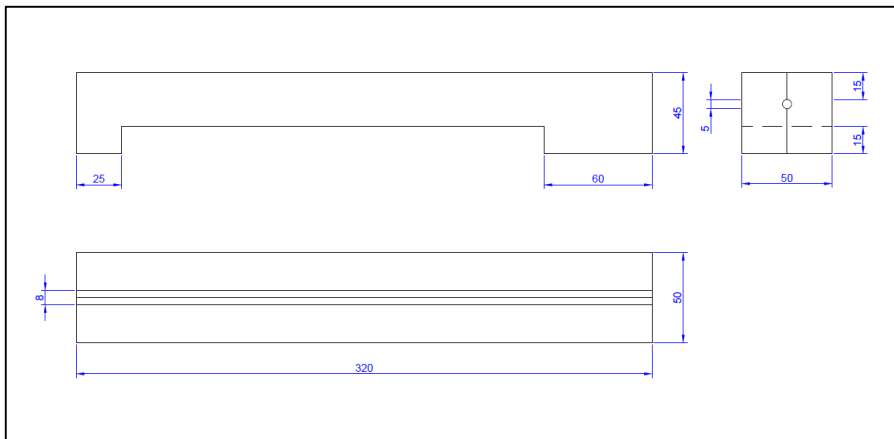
Solvent trap drawing dimensions done with AutoCAD.
